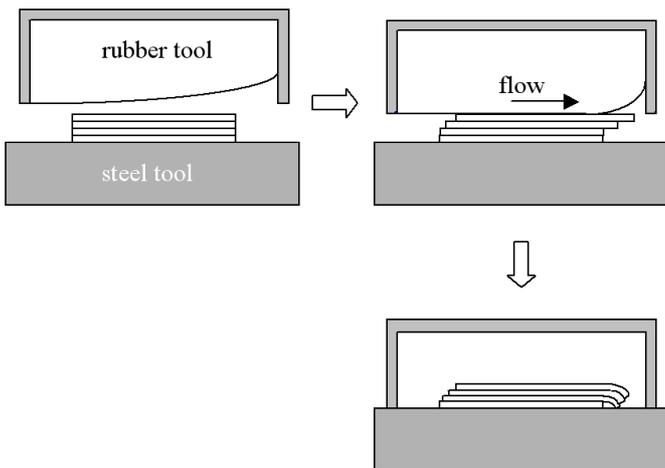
Transverse shearing of a laminate due to non-flatness of the rubber tool during rubber pressing
